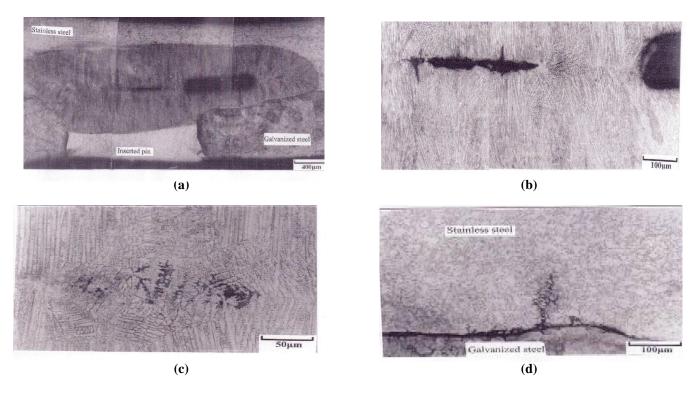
Optical microstructure of welding nugget of 7 kA, inserted pin technique
